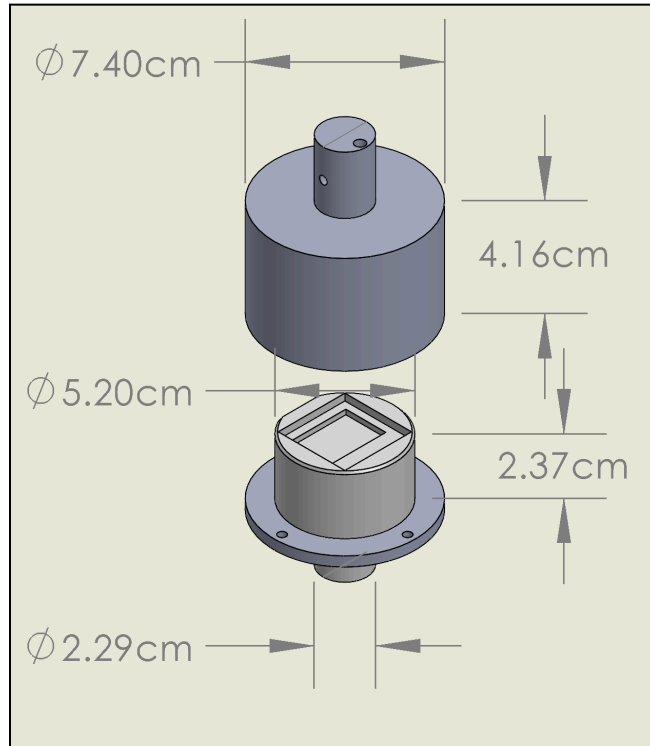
Dimensioned SolidWorks assembly of housing chambers for the load cells
